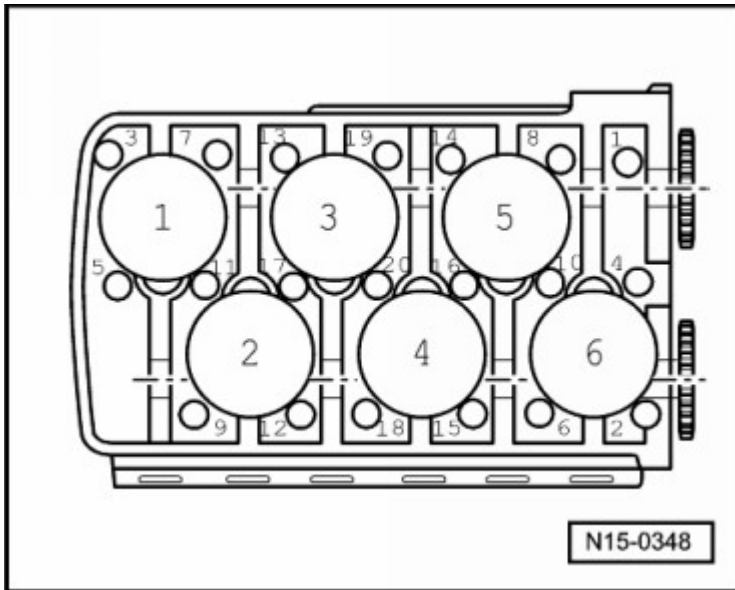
Identifying Cylinder Head Bolts Removal Sequence
